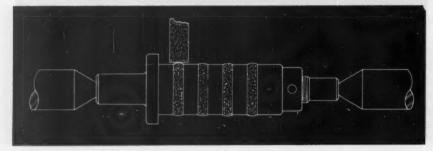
In grinding the bushings and spacers to size, the arbor nut is tightened sufficiently to produce a slight bulge of the rubber bushings.
